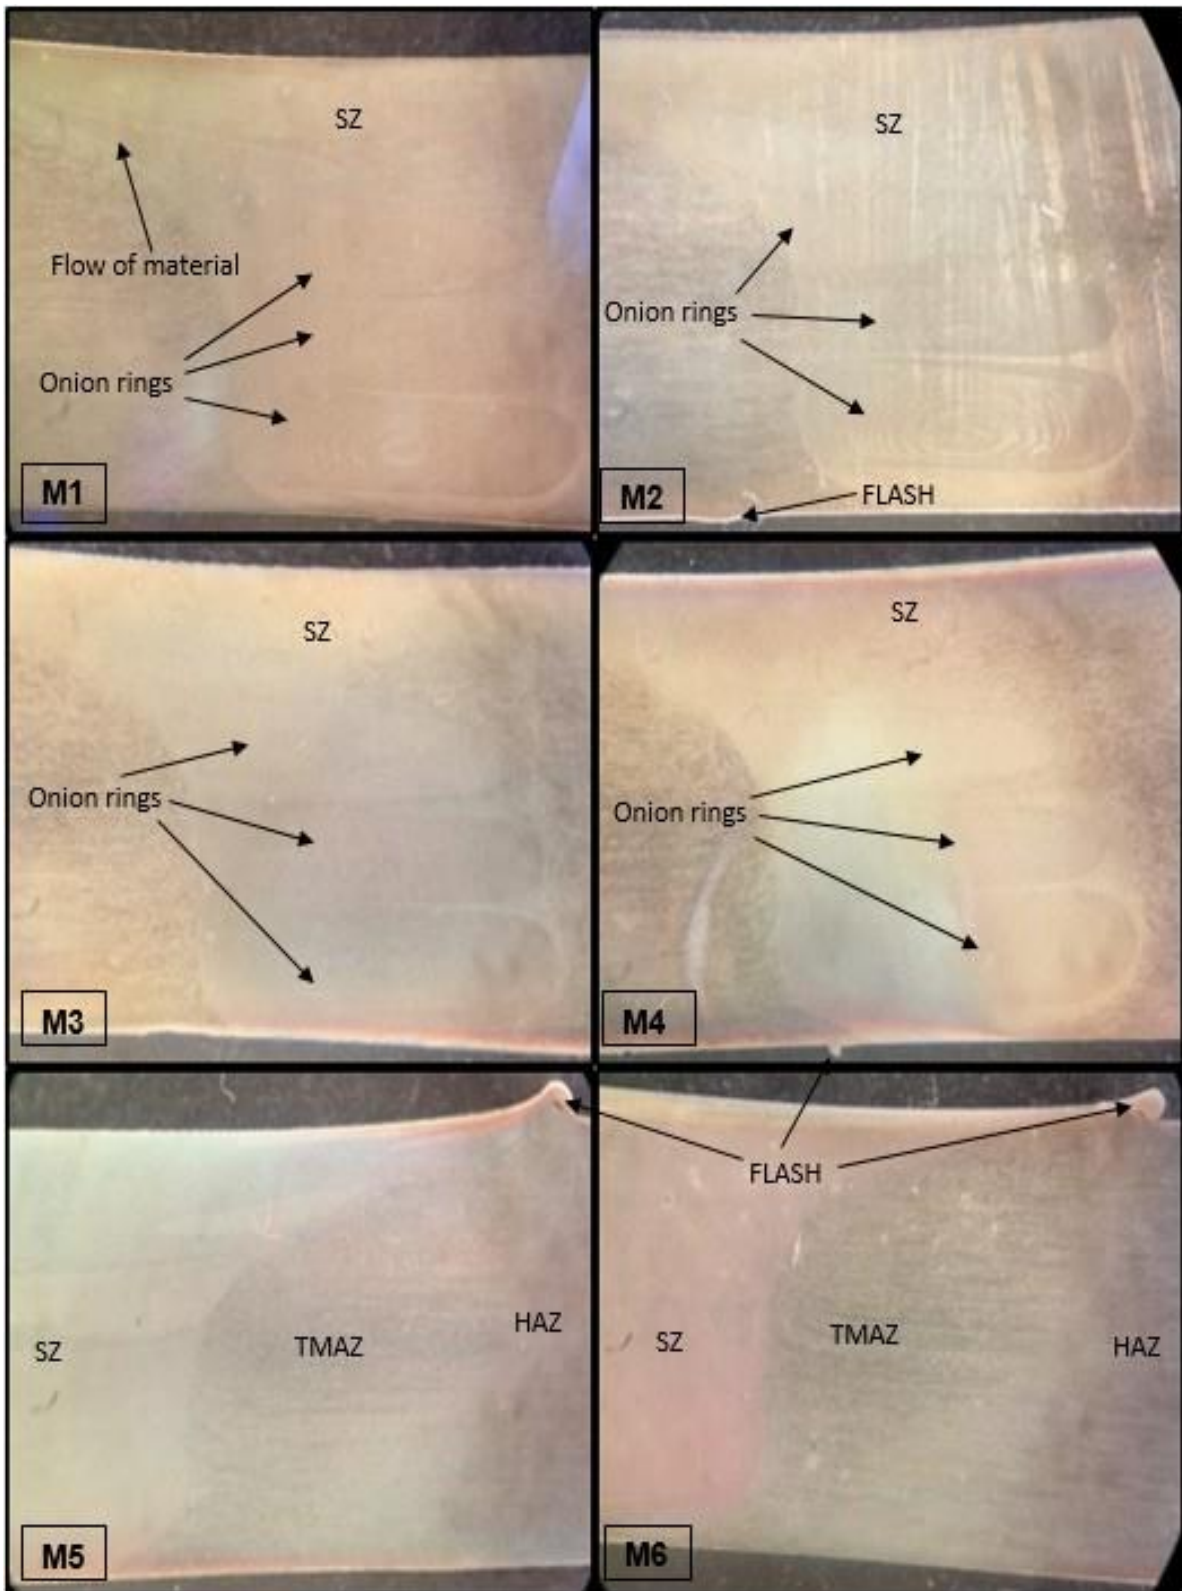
Shows the macrostructure of FSW specimens taken from the middle of the weld, welded at six different rotational speeds
